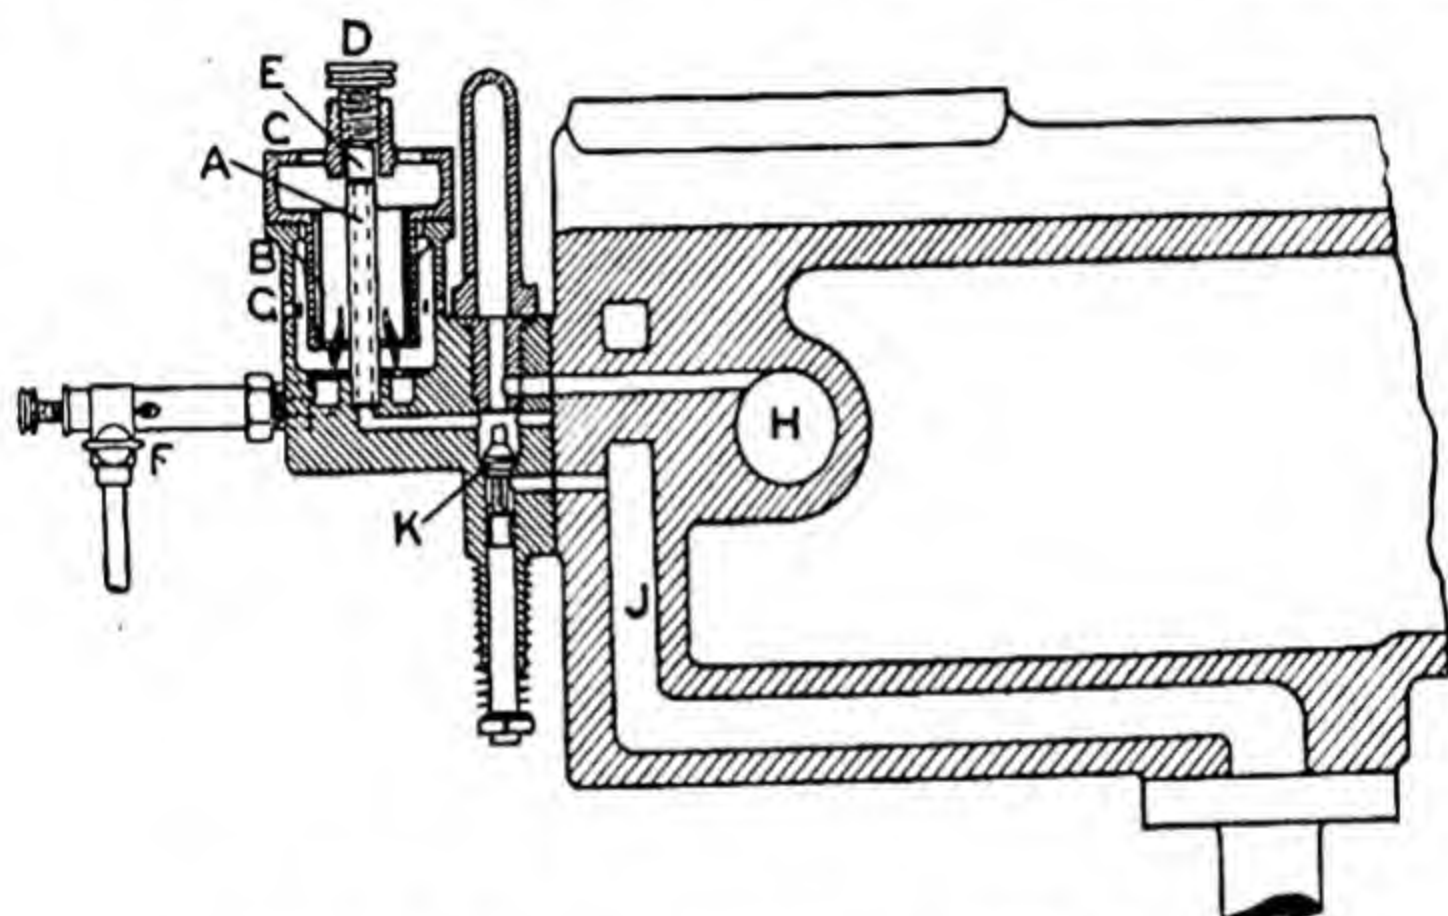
Ignition arrangements in the Crossley gas engine.
